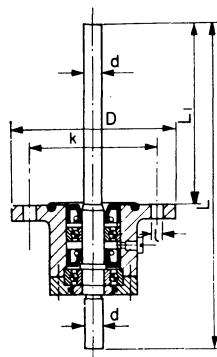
Dimensions of shaft seals supplied by Pfeiffer⁹⁸⁷ (Table 5.8)
